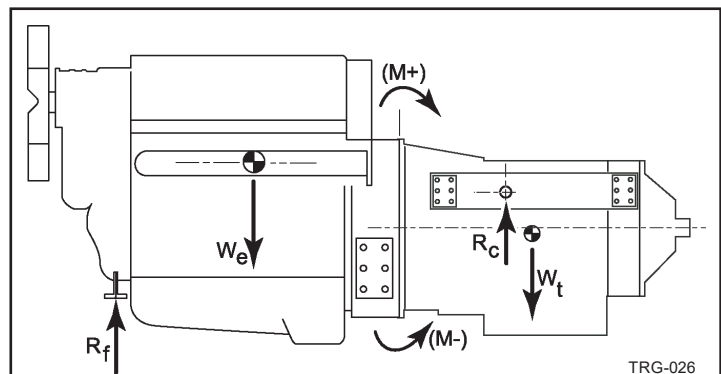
Typical Cradle Mount for 4000 Product Family 7-Speed Transmission Models
